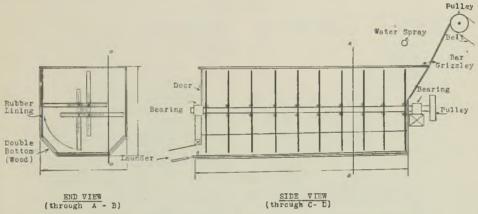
Puddling Machine used for the disintegration of diamondiferous clay.
